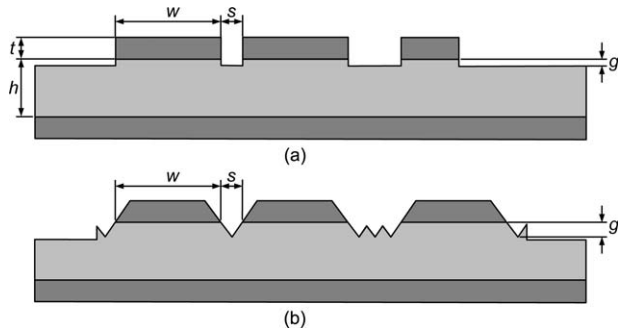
Typical profiles of machined PCB traces (cross-section) obtained with (a) cylindrical milling tool and (b) conical milling tool and cylindrical rubout tool
